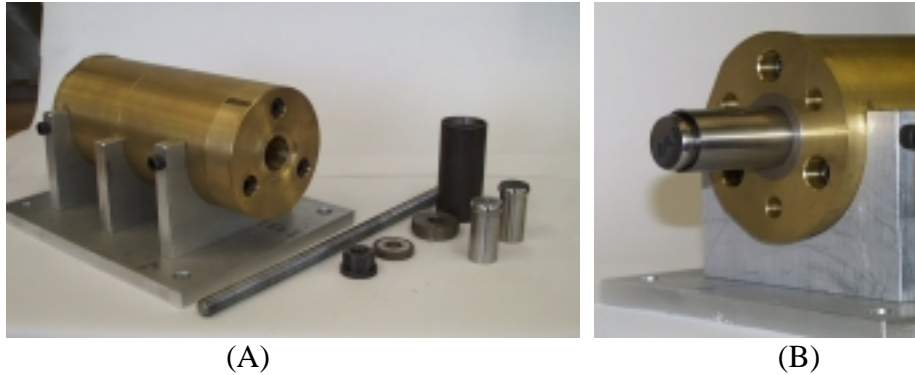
(A) Draw Die Components, (B) Draw Die with Draw Plug and Target Tubes Exposed
